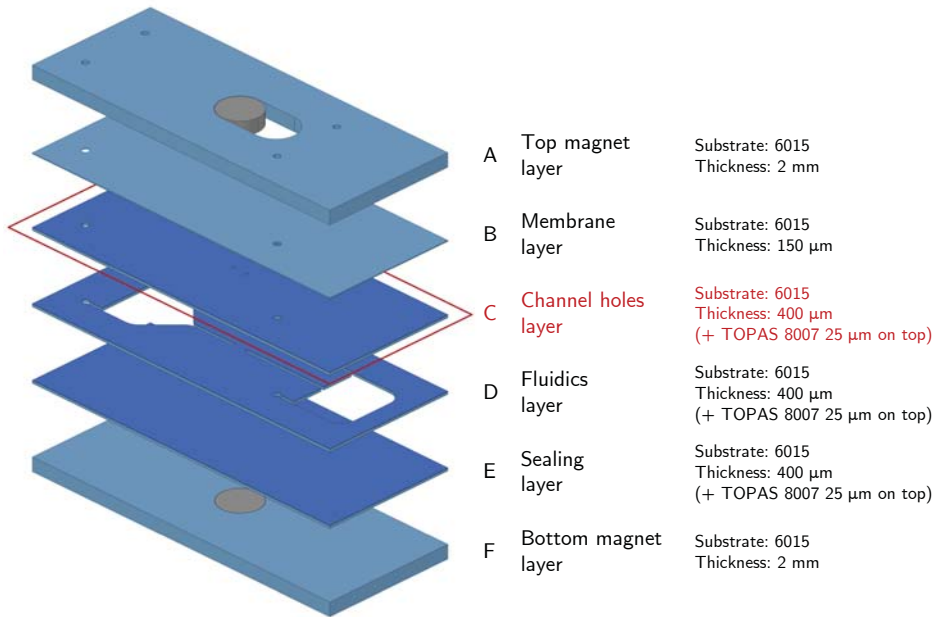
Scheme of the second valve design prototypes. The extra 400 μm thick layer required for these prototypes is framed in red.
